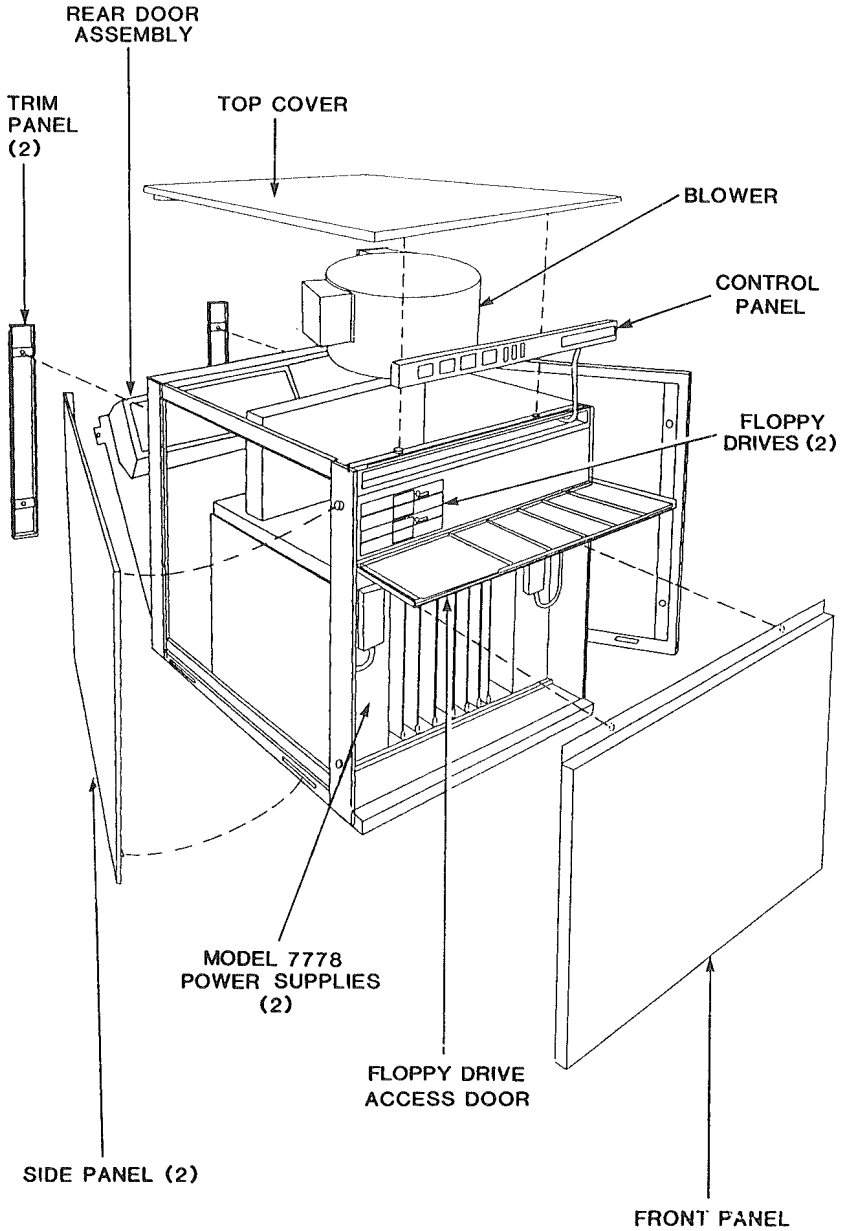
MODEL 4050/4150 EXPLODED VIEW
